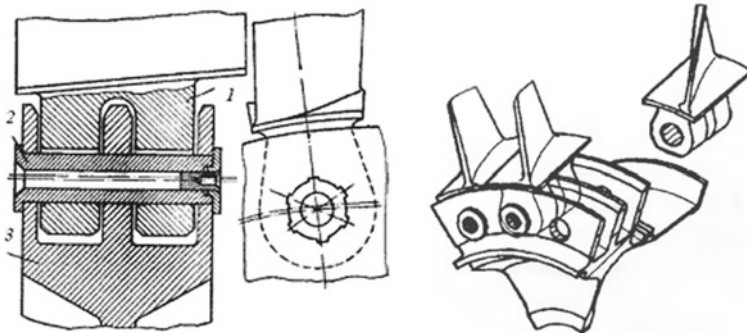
Hinge-type method of mounting. 1—blade; 2—pin (hinge); 3—disk
